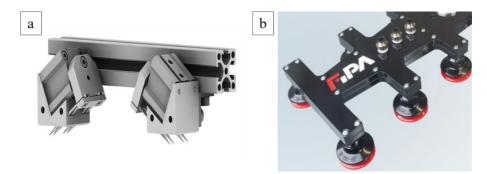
(a) Needle gripper which can be attached to robot to handle preform and (b) Vacuum gripper to handle part after compression moulding (ASS, 2016) (FIPA, 2016)
